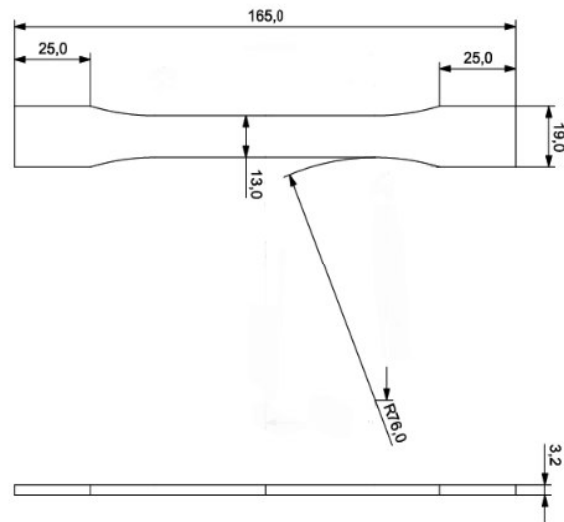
2D dimensions of 3D printed specimens for tensile testing. The dimensions and geometry mentioned equate to those prescribed by the standard ASTM D638-14 for the type I tensile testing specimen.
